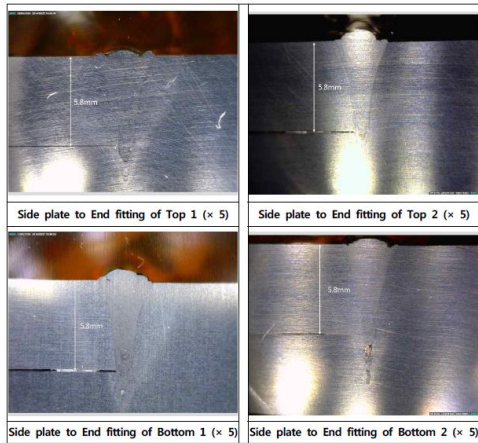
Macro-sections of the upper and lower welds with side plate to end fitting parts.
